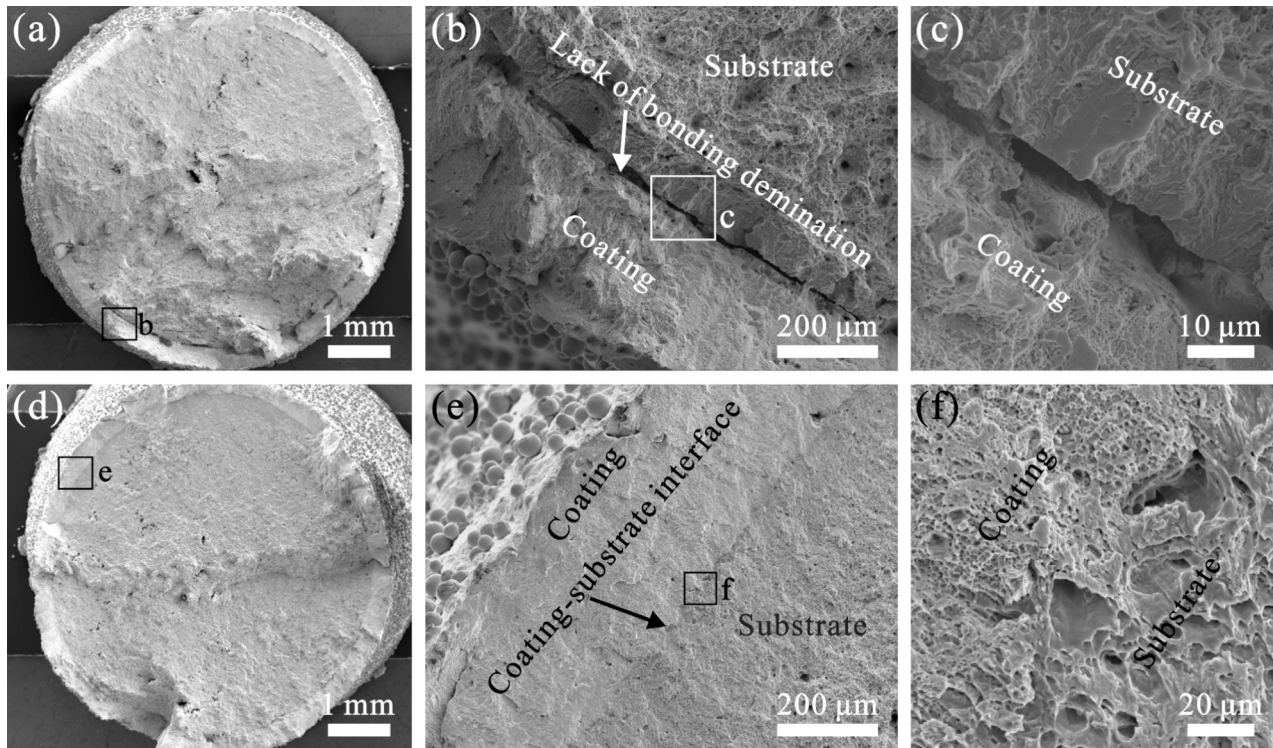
Tensile fracture surfaces of single-layer coated specimens deposited at (a-c) 1.6 kW laser power; (d-f) 1.8 kW laser power.
